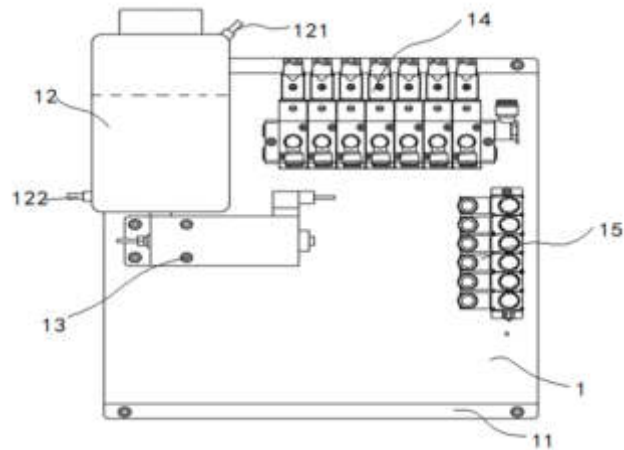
Partial schematic diagram of dust removal and lubricating oil supply components
